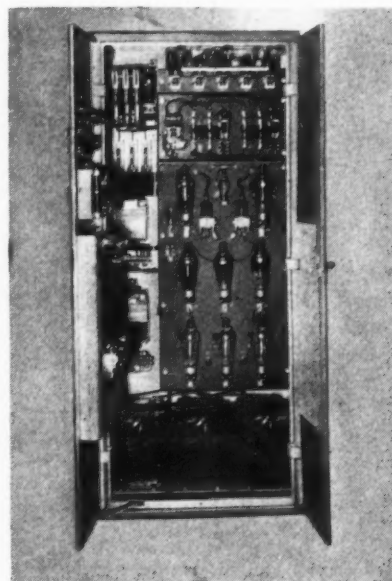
General Electric Control for the Resistance-welding of Aluminum
